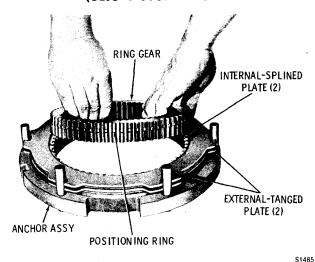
Assembling high-range clutch and anchor (TRT-3 overdrive)
